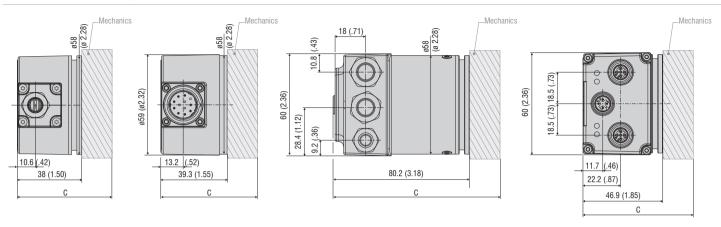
Dimensional drawing WDS- ... - P60 - CR - HTL/TTL
